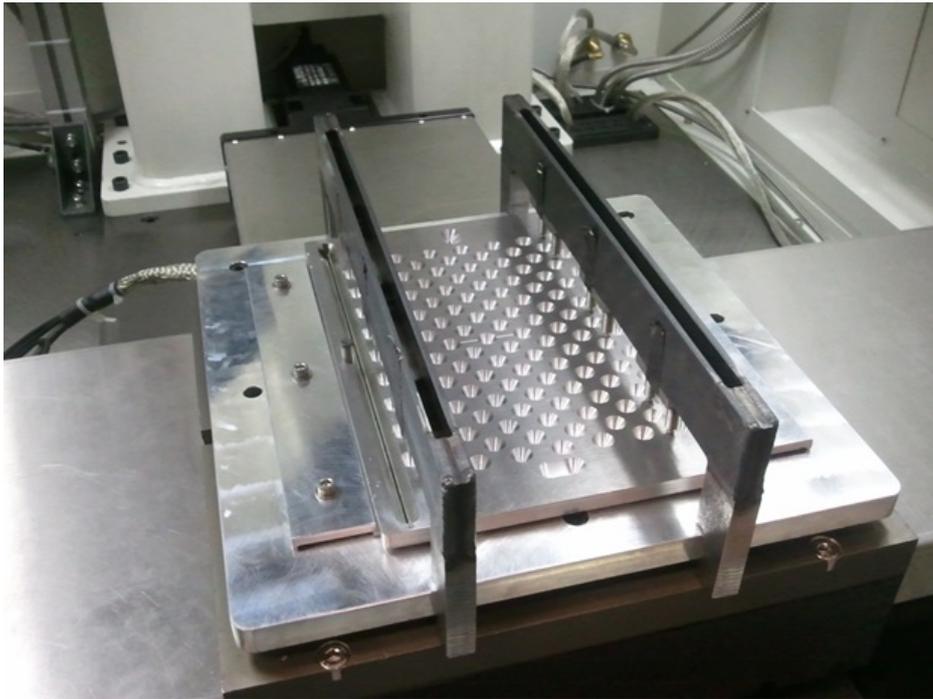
An example of fixed mode workholding for a large, 9x7[in] multilayered device. This setup includes a base plate datum, welding clamps, welding plate, and bar clamps to provide pressure.
